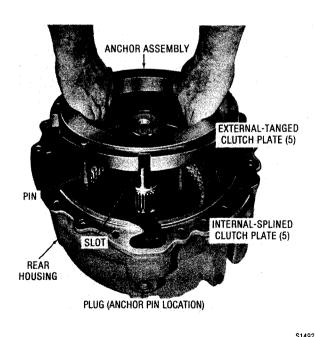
Installing low-range clutch anchor assembly (TRT-3 underdrive)
